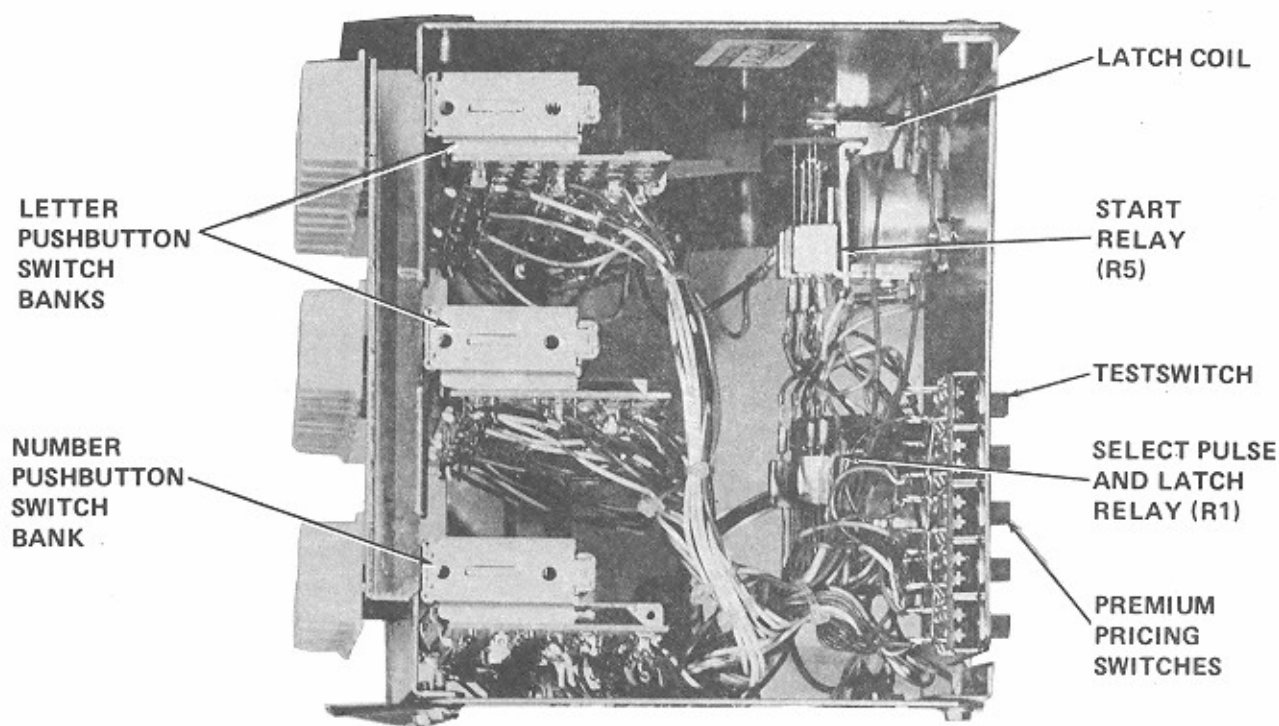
SELECTOR ASSEMBLY COMPONENTS
